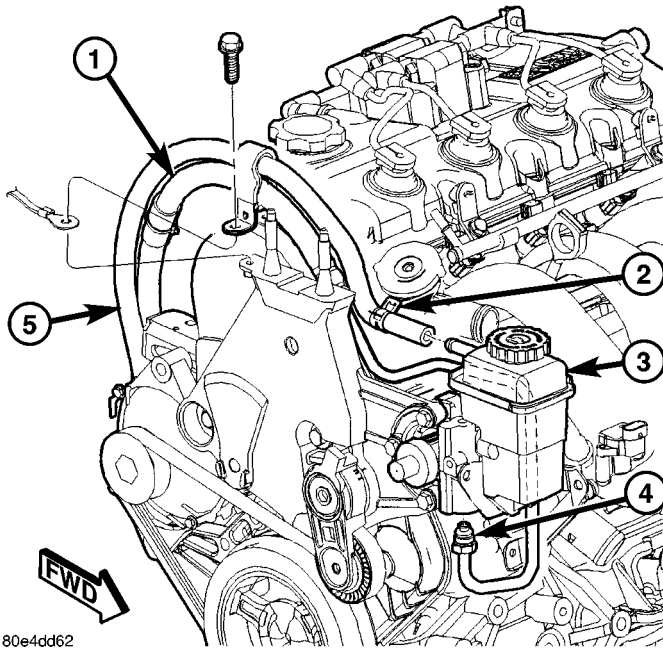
Power Steering Hoses At Pump - 2.0L Engine
